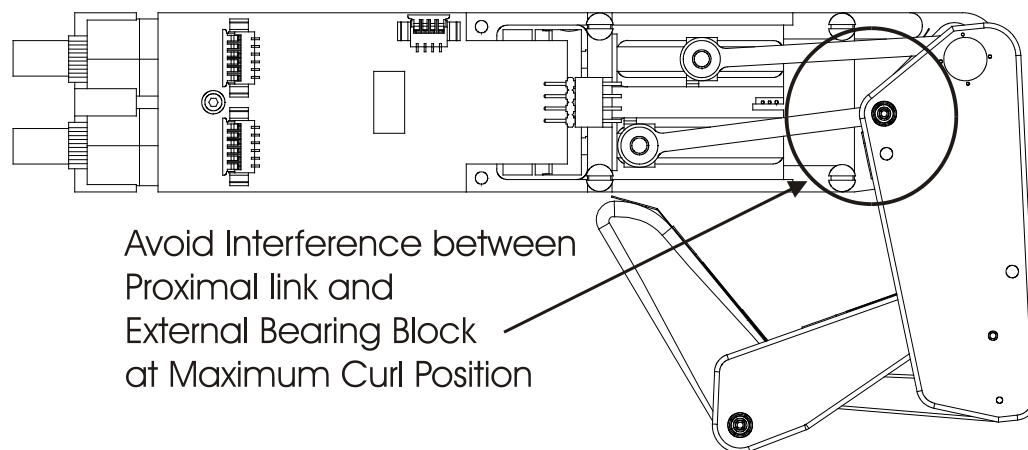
Clearance between Rotated Proximal Link and External Bearing Housing
